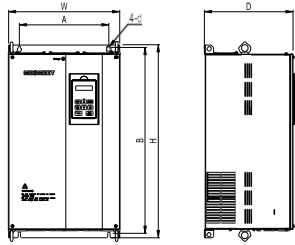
Outline, mounting dimensions for products of R5~R8
